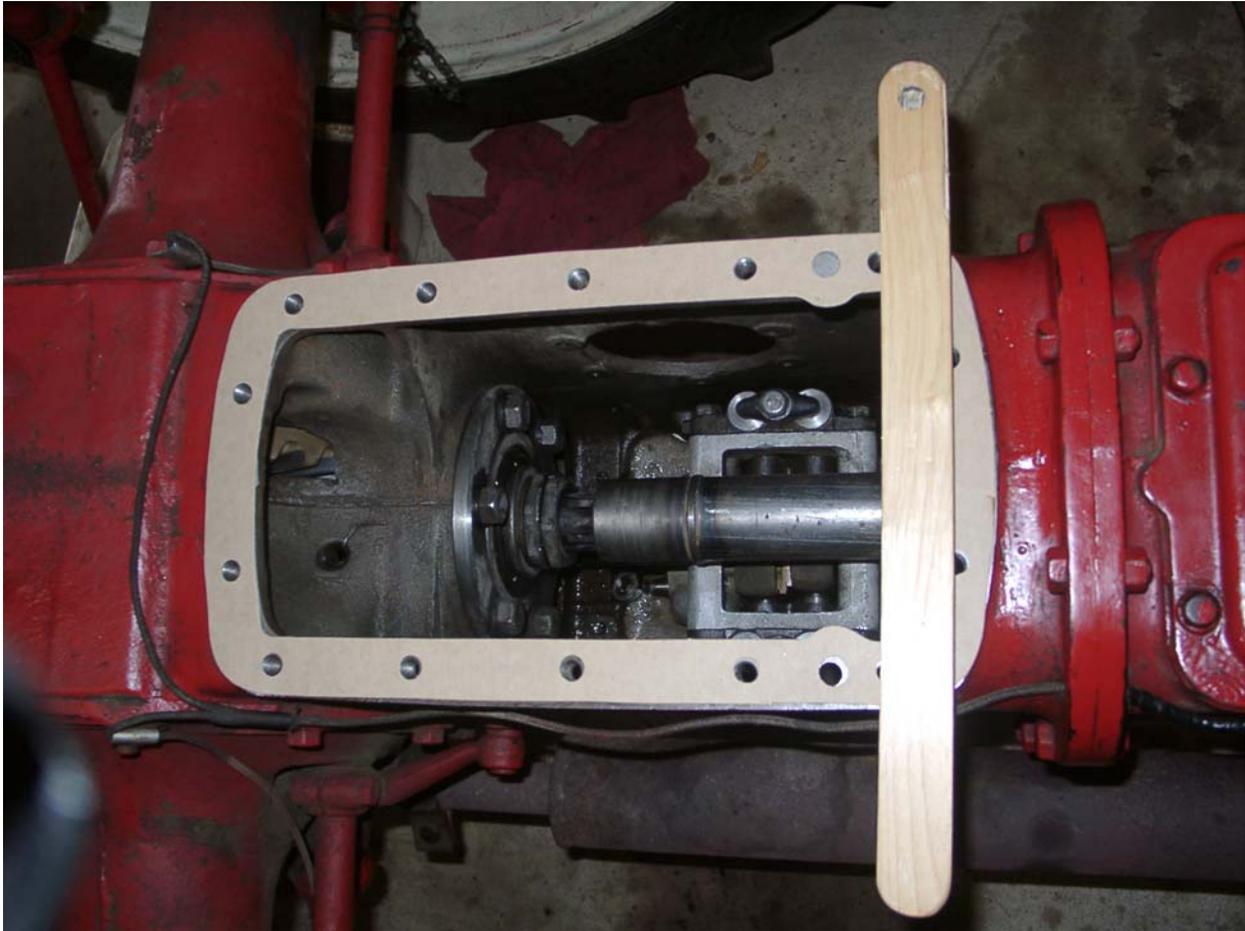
Center Housing with new gasket applied, 1" wood spacer to hold top cover in place while installing control rod.
